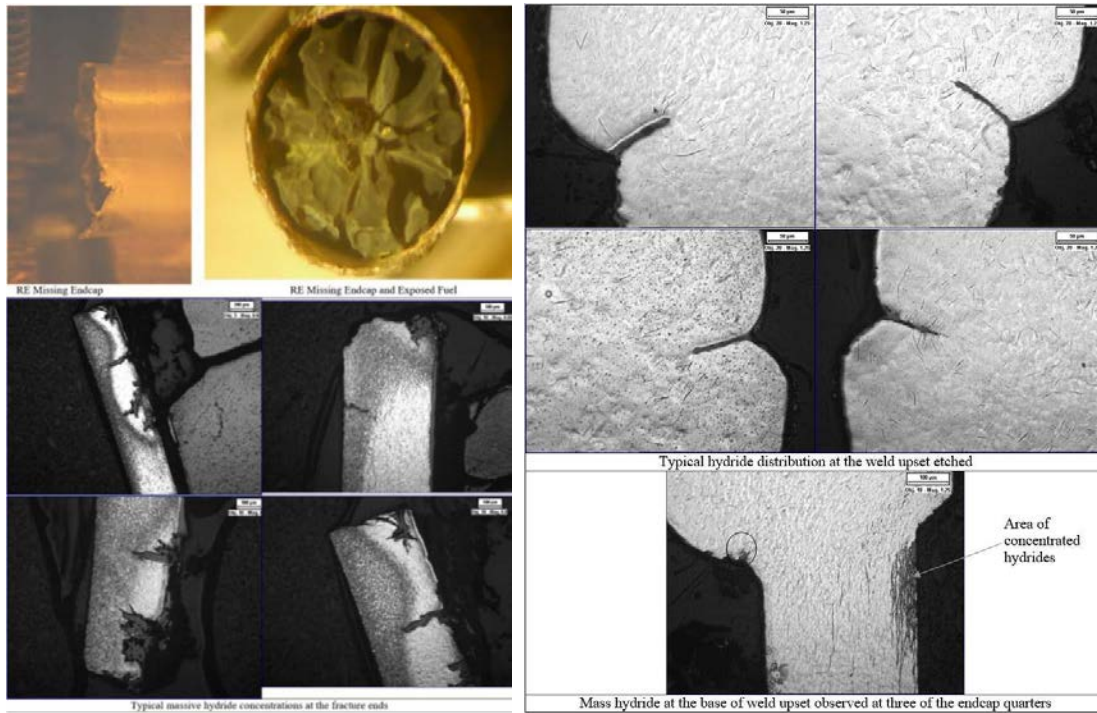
Left: Secondary damage to RE endcap (element 14); Right: A typical intact weld upset (element 18).
